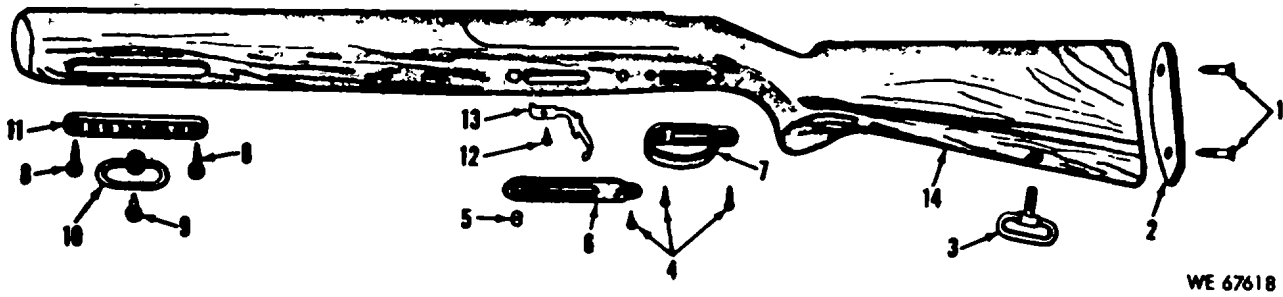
Stock assembly for Caliber .22 Remington Rifle, Model 513-T - exploded view.
